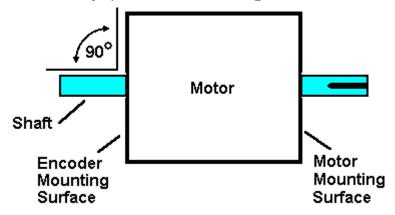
Runout of motor mounting surface to motor shaft centerline
